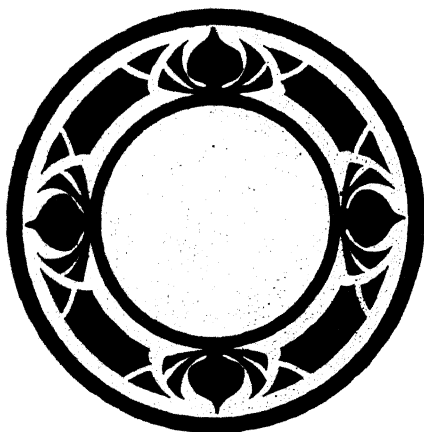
From a prepared pattern make a plaster mold the size of the tile desired. Stamp the design in the bottom of this mold, and with a sharp, chisel-like tool, scrape away the design to a depth of $1/16$ in. This will give a tile with raised design and a depressed background. The design should be glazed with an appropriate combination of colors, and fired once in the glaze firing.
